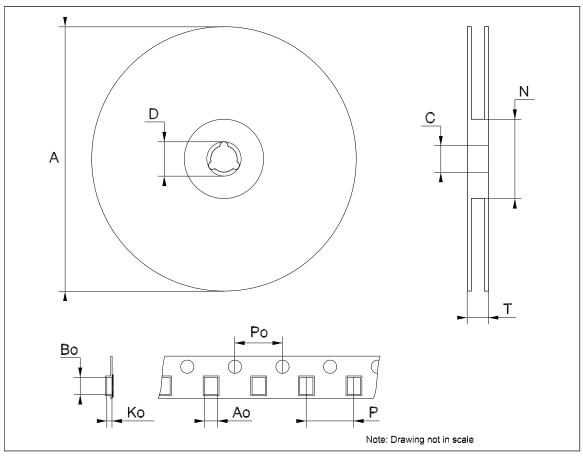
Drawing dimension QFN8 (3 x 3 mm)
